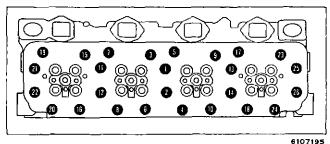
Cylinder head tightening sequence — V8-350 and VT8-430
